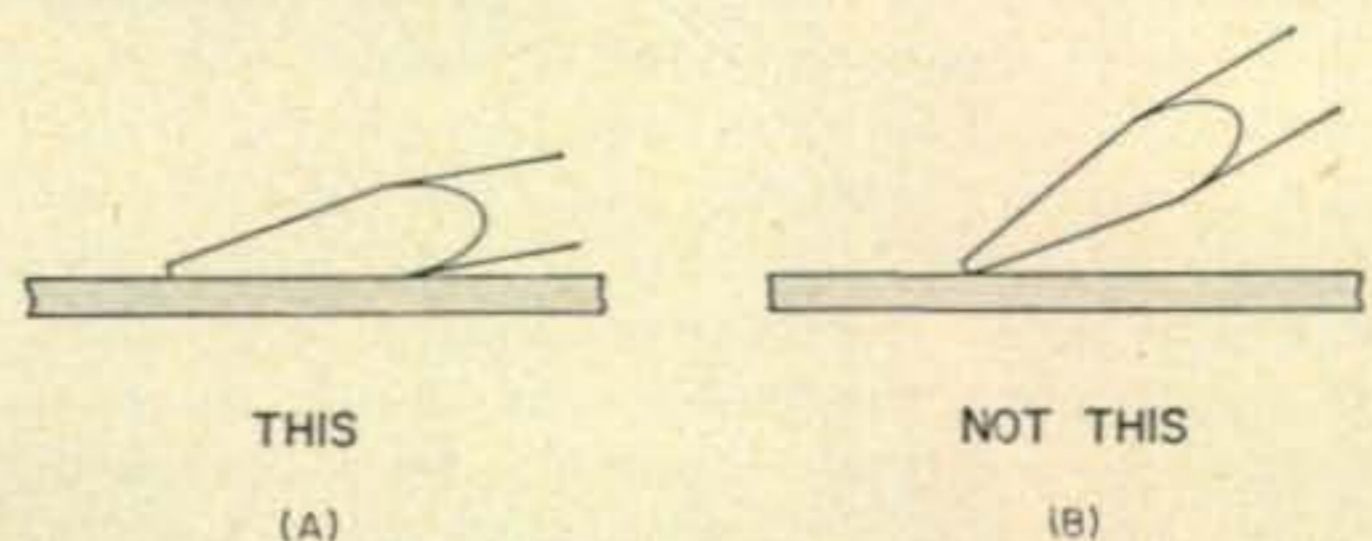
Application of soldering iron to a surface. The full side of the tip should be placed against the surface as shown at (A), not just the point of the tip as shown at (B).
